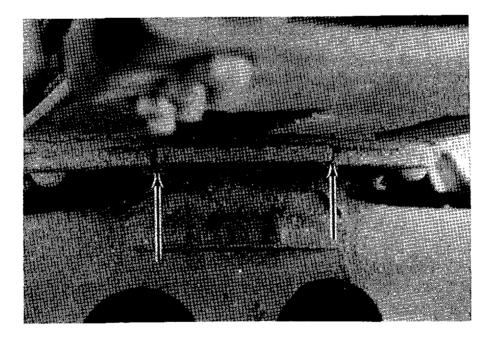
Fractured centerplate at "B" end of GN 78206.
